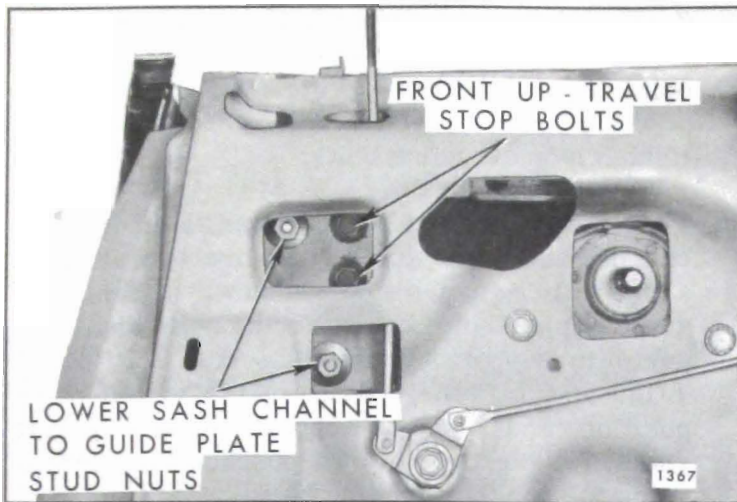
Rear Door Window Removal - 68069-68169 Styles
